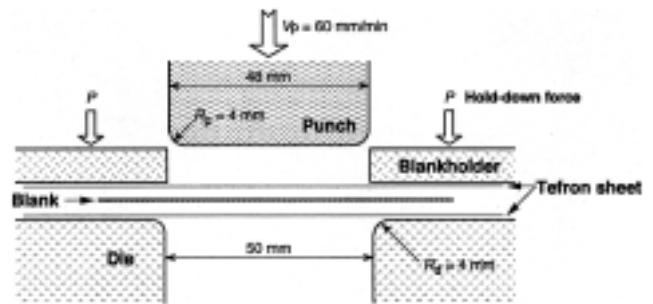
Schematic illustration of the die and blank configuration for deep drawing of the magnesium sheet into a square cup.
